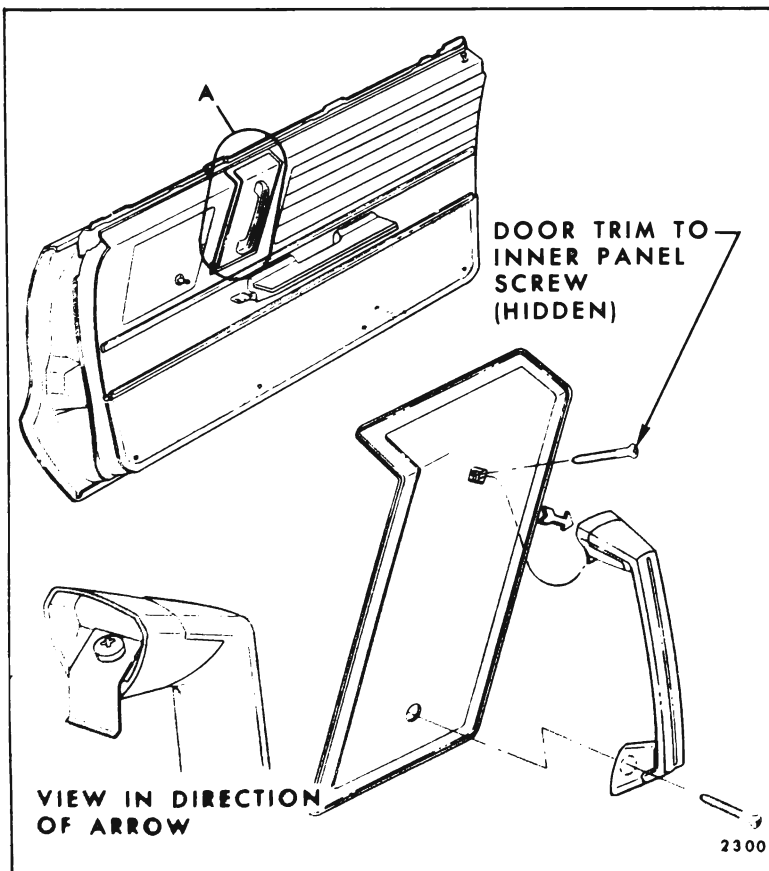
Door Pull Handle Removal - 49487 Style with Standard Trim
